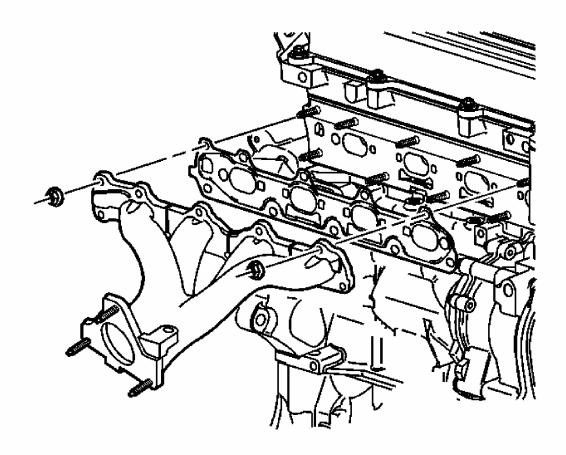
View Of Exhaust Manifold & Gasket Courtesy of GENERAL MOTORS CORP.
